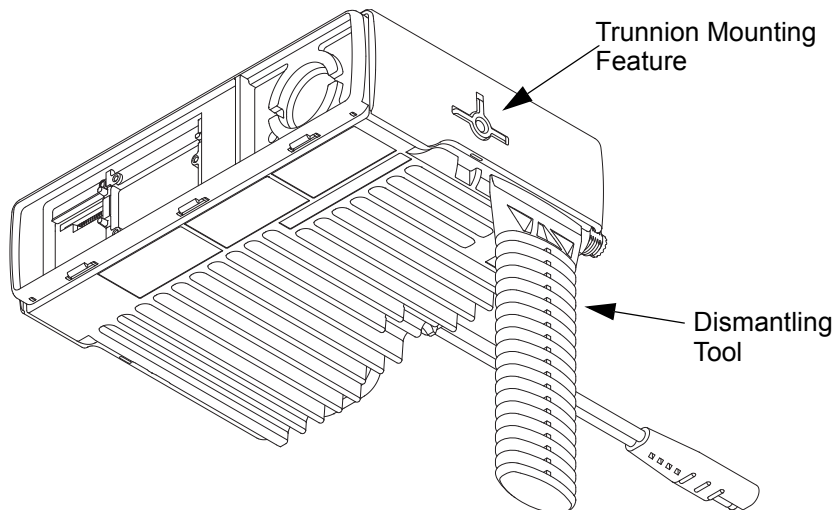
Top Cover Removal (Image May Not Match Exact Product)
